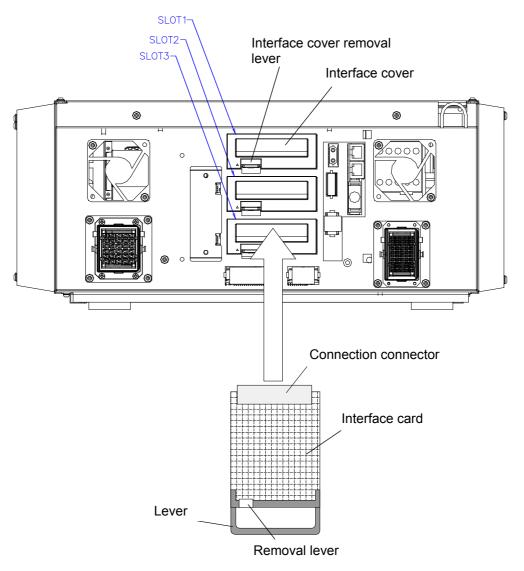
Mounting of the CC-Link interface card (CR2D controller)
